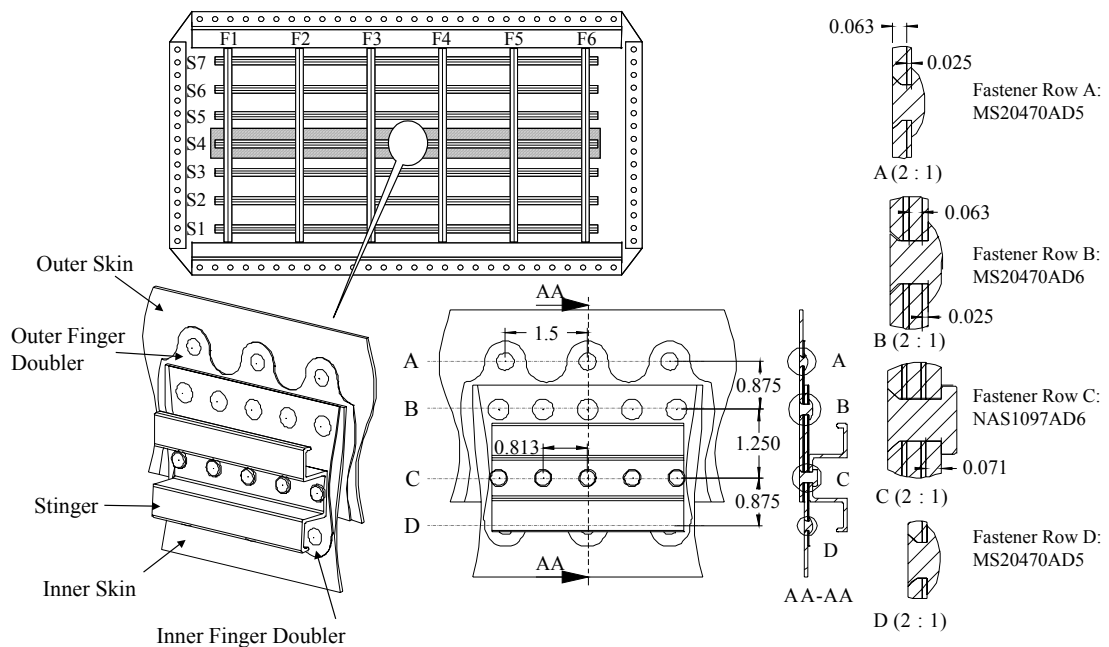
Lap joint construction along stringer S4. All dimensions in inches
